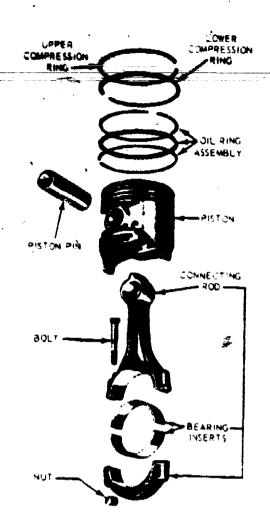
Piston, Piston Rings, Connecting Rud, and Connecting Rod Bearings.
